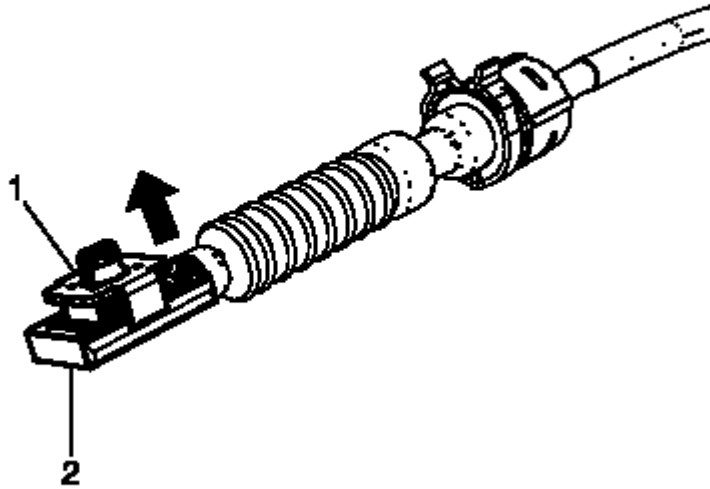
Cable Adjuster And Cable Adjuster Guide
